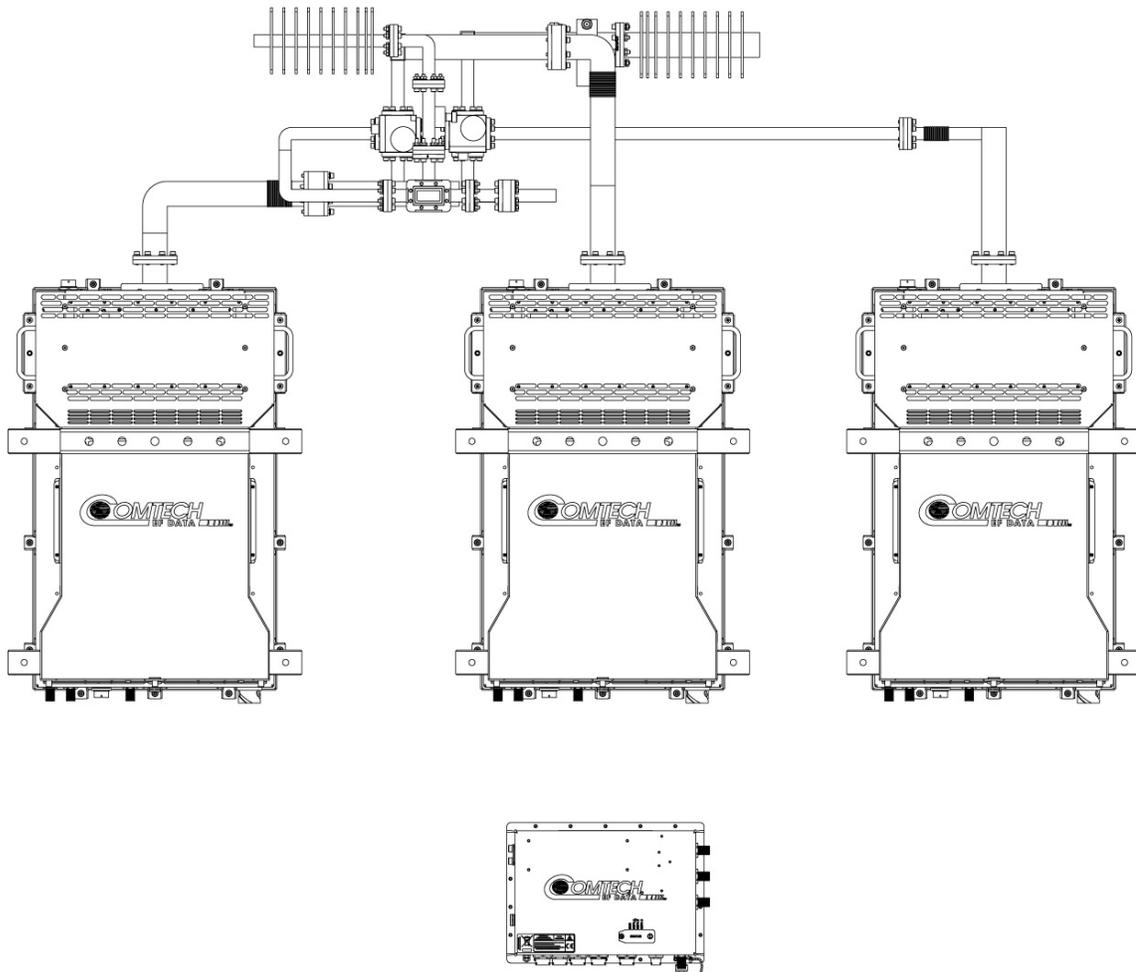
PCB-4300A 1:2 Phase Combiner System Assembly Example
